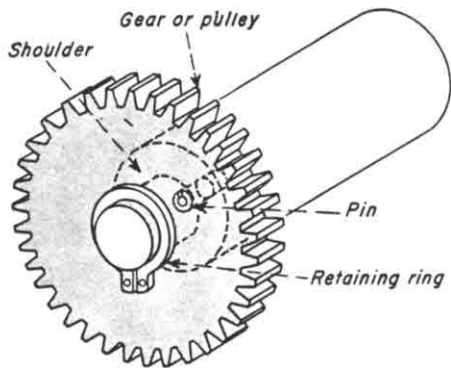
A retaining ring allows quick gear removal in light-load applications. A shoulder on the shaft is necessary. A shear pin can secure the gear to the shaft if protection against an excessive load is required.
